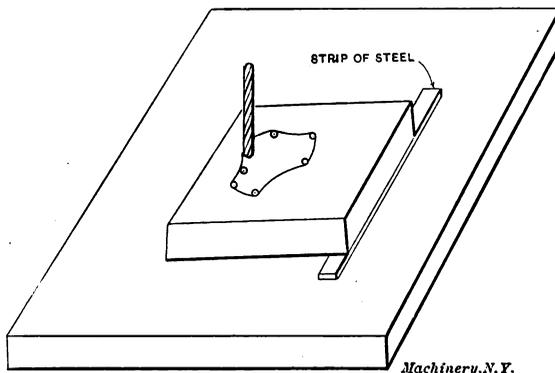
Method of Obtaining Clearance when Drilling out the "Core."
